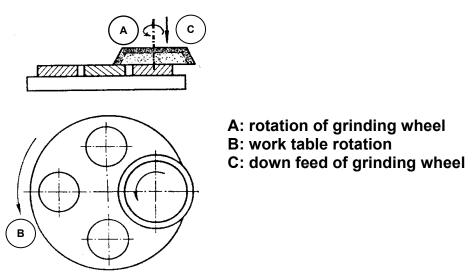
Surface grinding in vertical spindle rotary table surface grinder
